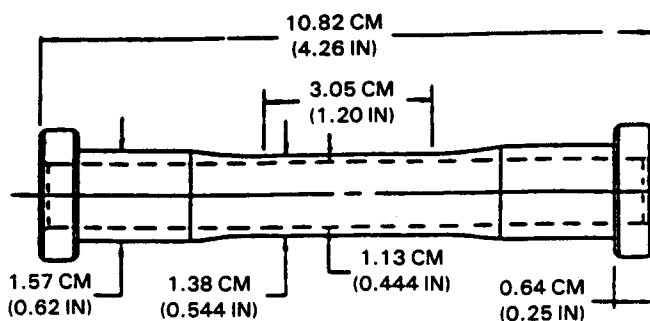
Geometries of Tubular Specimens for Fatigue Testing
